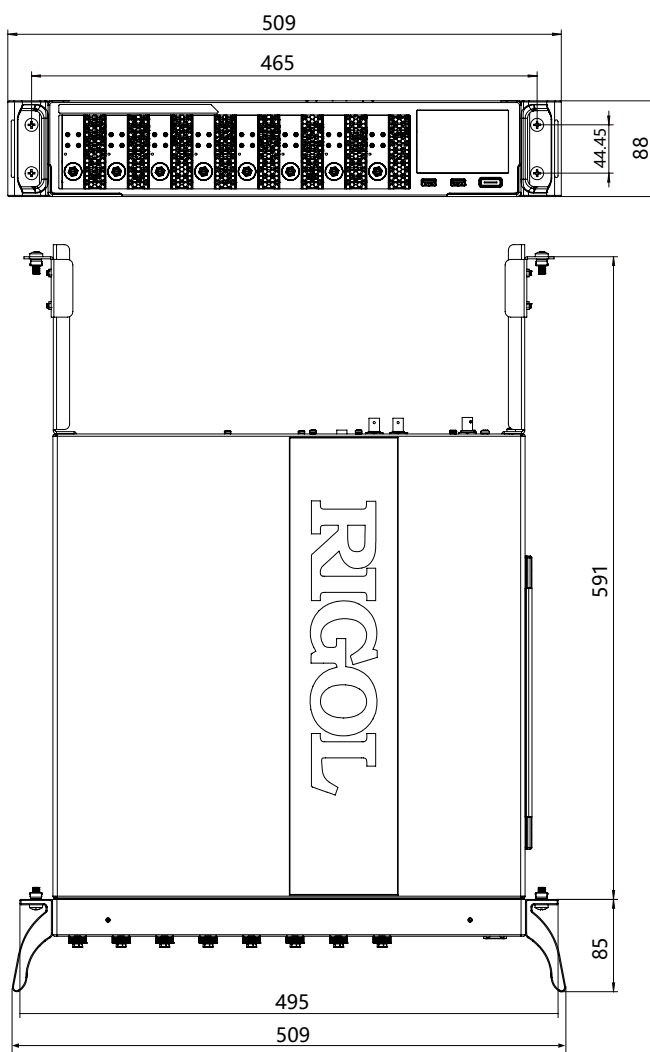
Dimensions of Rack-mounted Instrument (Unit: mm)
